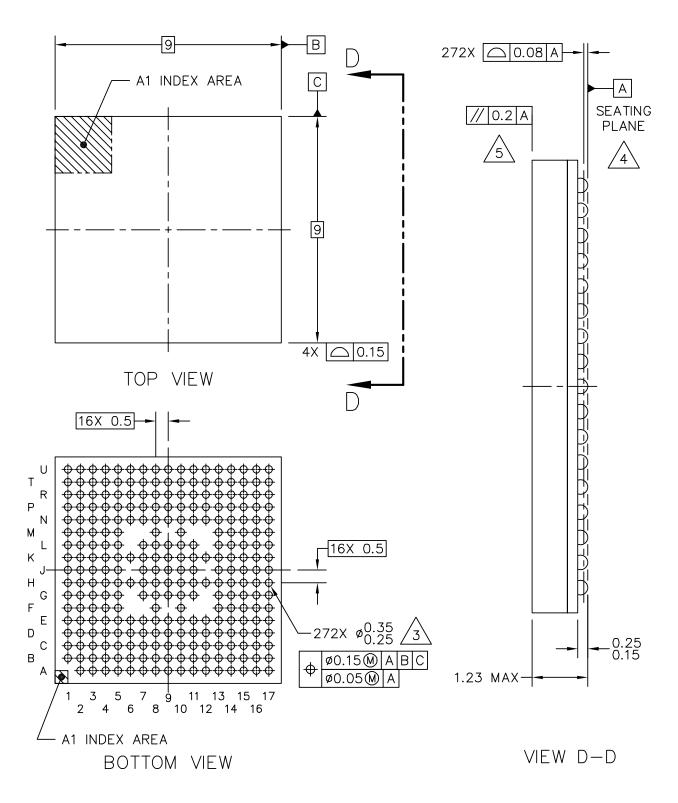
9X9 mm BGA, Case x Package Top, Bottom, and Side Views
